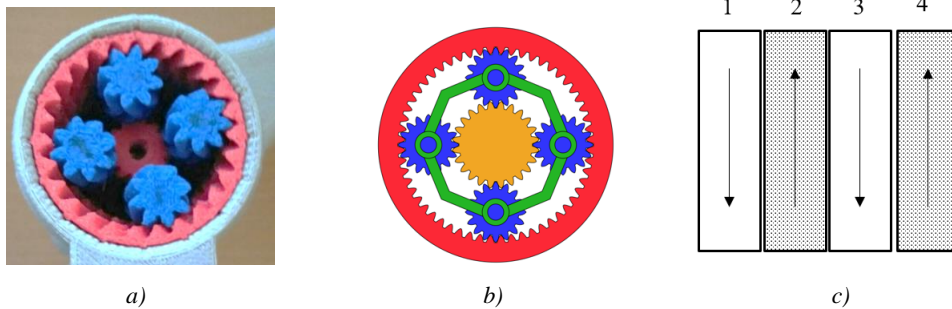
Principle of operation of the reducer: a – reducer inserted into the opening of the section arm; b – drawing of the reducer; c – direction of rotation of the reducer sections
